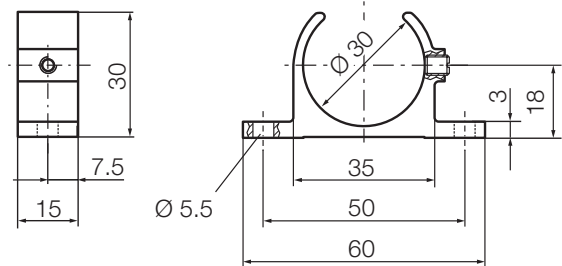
Mounting bracket BTL6-A-MF01-A-50
